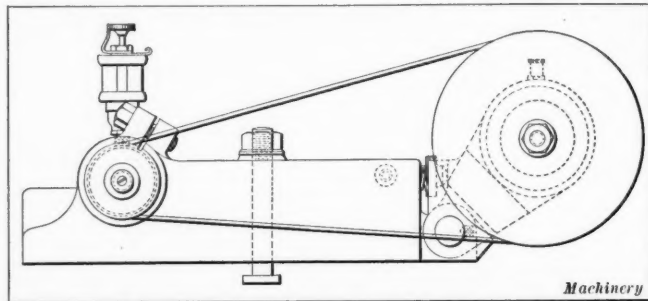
Drive from Countershaft to Wheel-spindle and Method of adjusting Belt Tension
